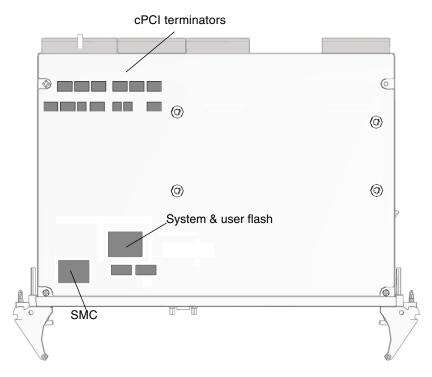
Typical Netra CP2500 Board – Solder Side
